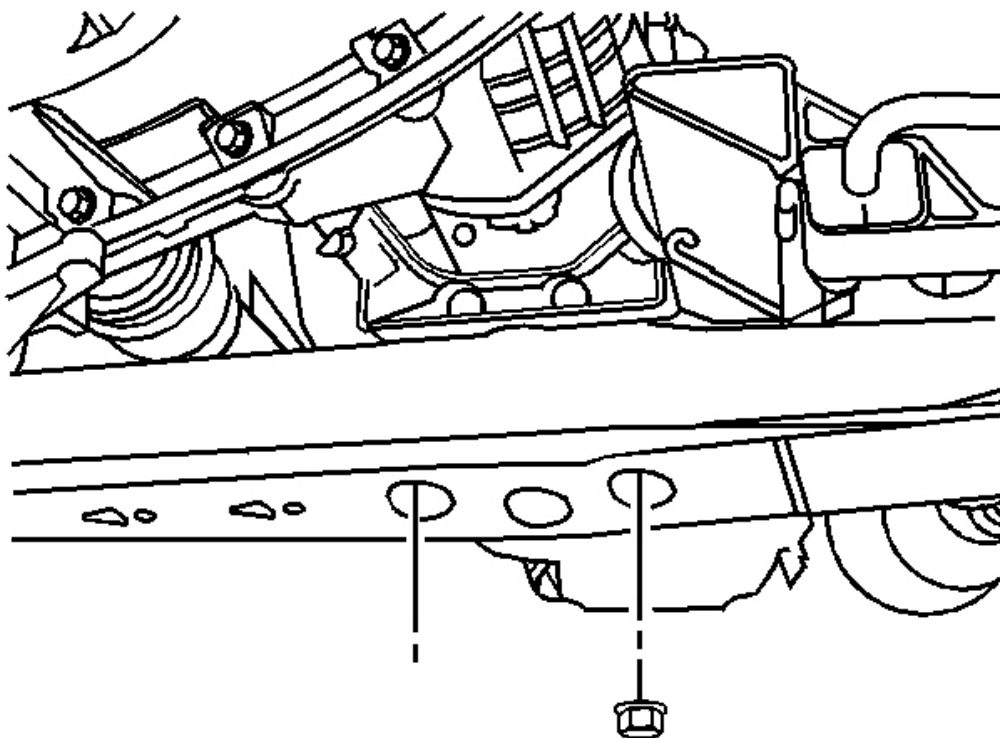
Identifying Lower Transmission Support to Frame Mounting Bolts
